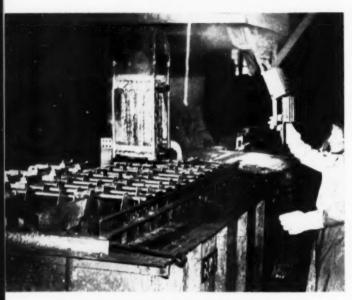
Load of Bearing Races Being Removed From Salt Bath Carburizing Furnace. Saw-toothed positioners support 23 fixtures in the furnace
